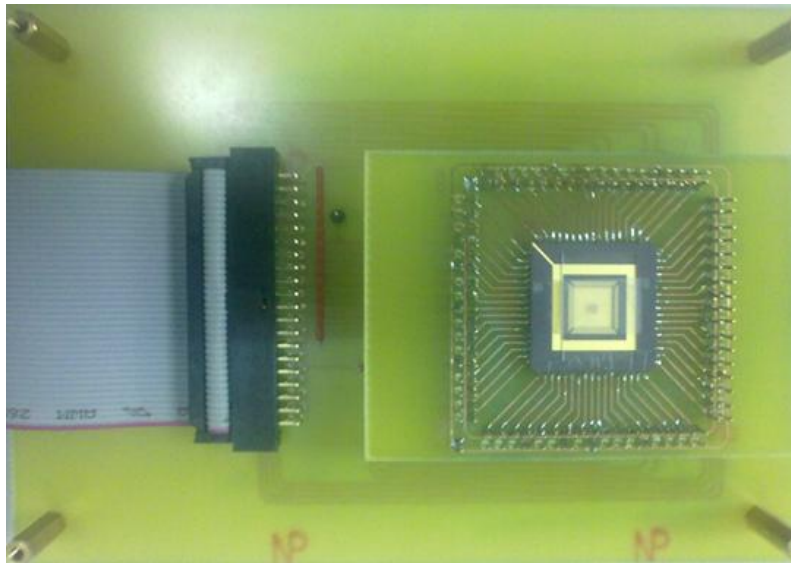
The self-made PCB with the packaged chip soldered on it
